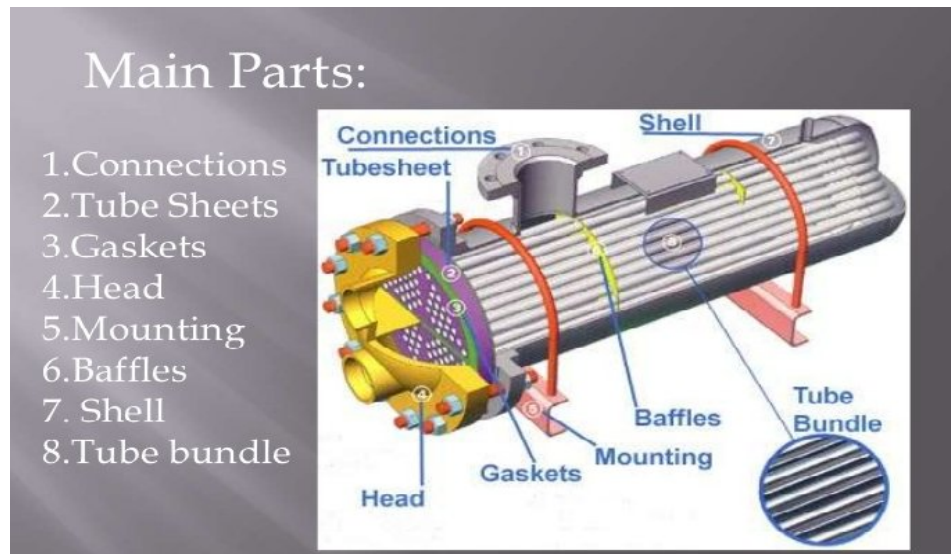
Main Parts of Shell and Tube Heat Exchanger
